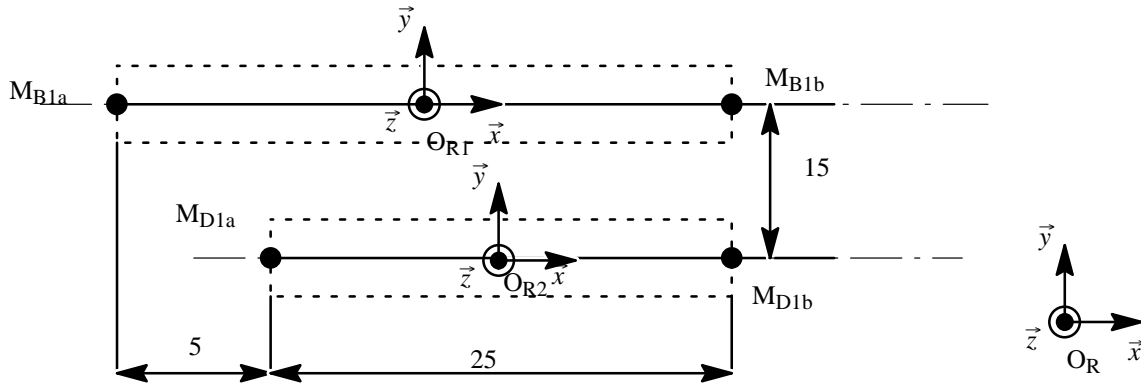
Tolerance zones between surface B1 and D1 (redrawn after [Rivière 94]).
